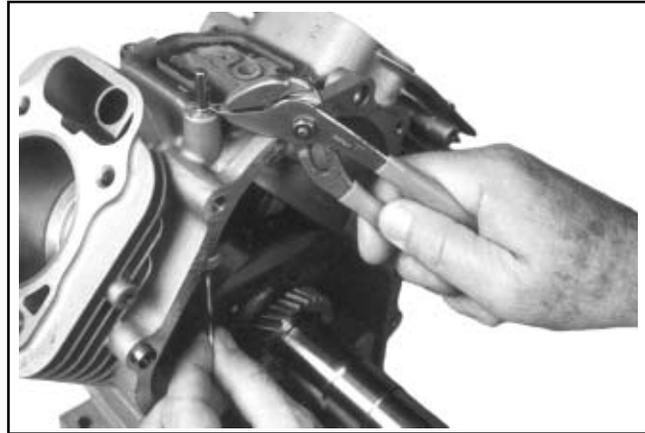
Installing Governor Cross Shaft Hitch Pin (6 mm Shaft).
